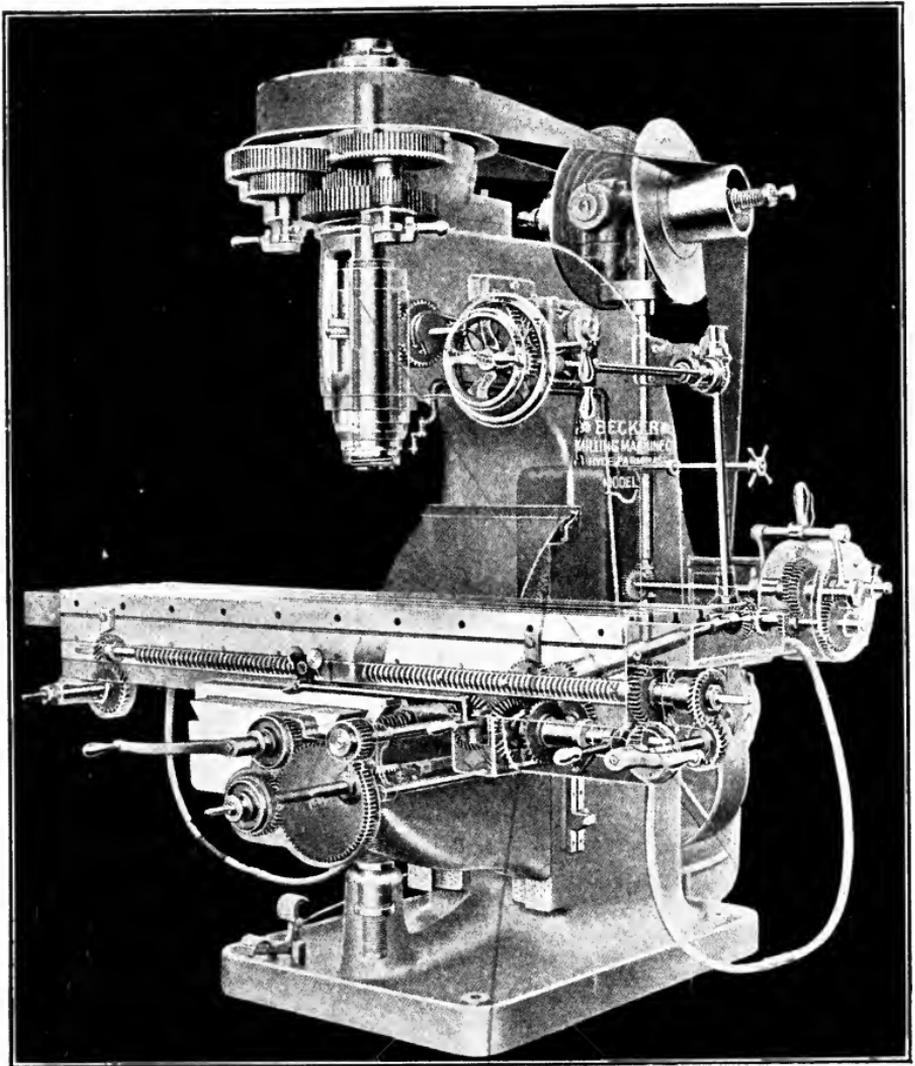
Vertical Milling Machine with Working Parts Shown in Ghost
